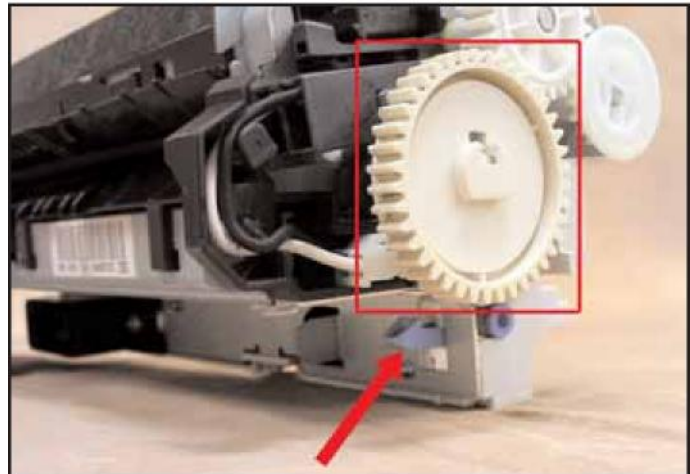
The 4200/4300 series fuser has a 40-tooth gear (red box) that engages with the swing plate assembly. Blue clips on either side of the fuser (red arrow shows right clip) secure the fuser in the printer.
